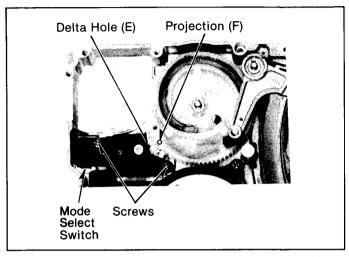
Assembly and Adjustment of Gears and Rod-(6)
